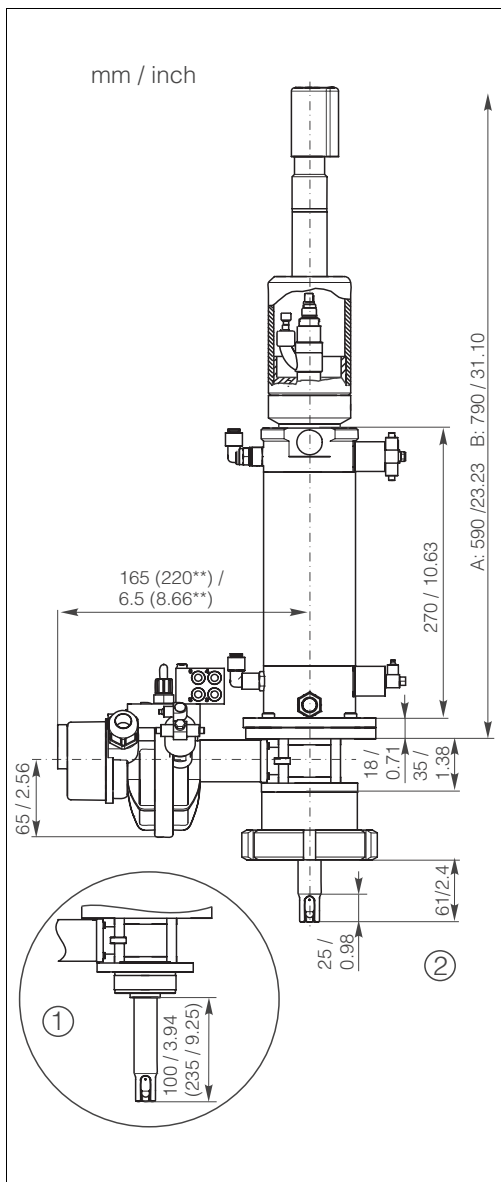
Assembly version;: pneumatic, short, for KCl sensors
